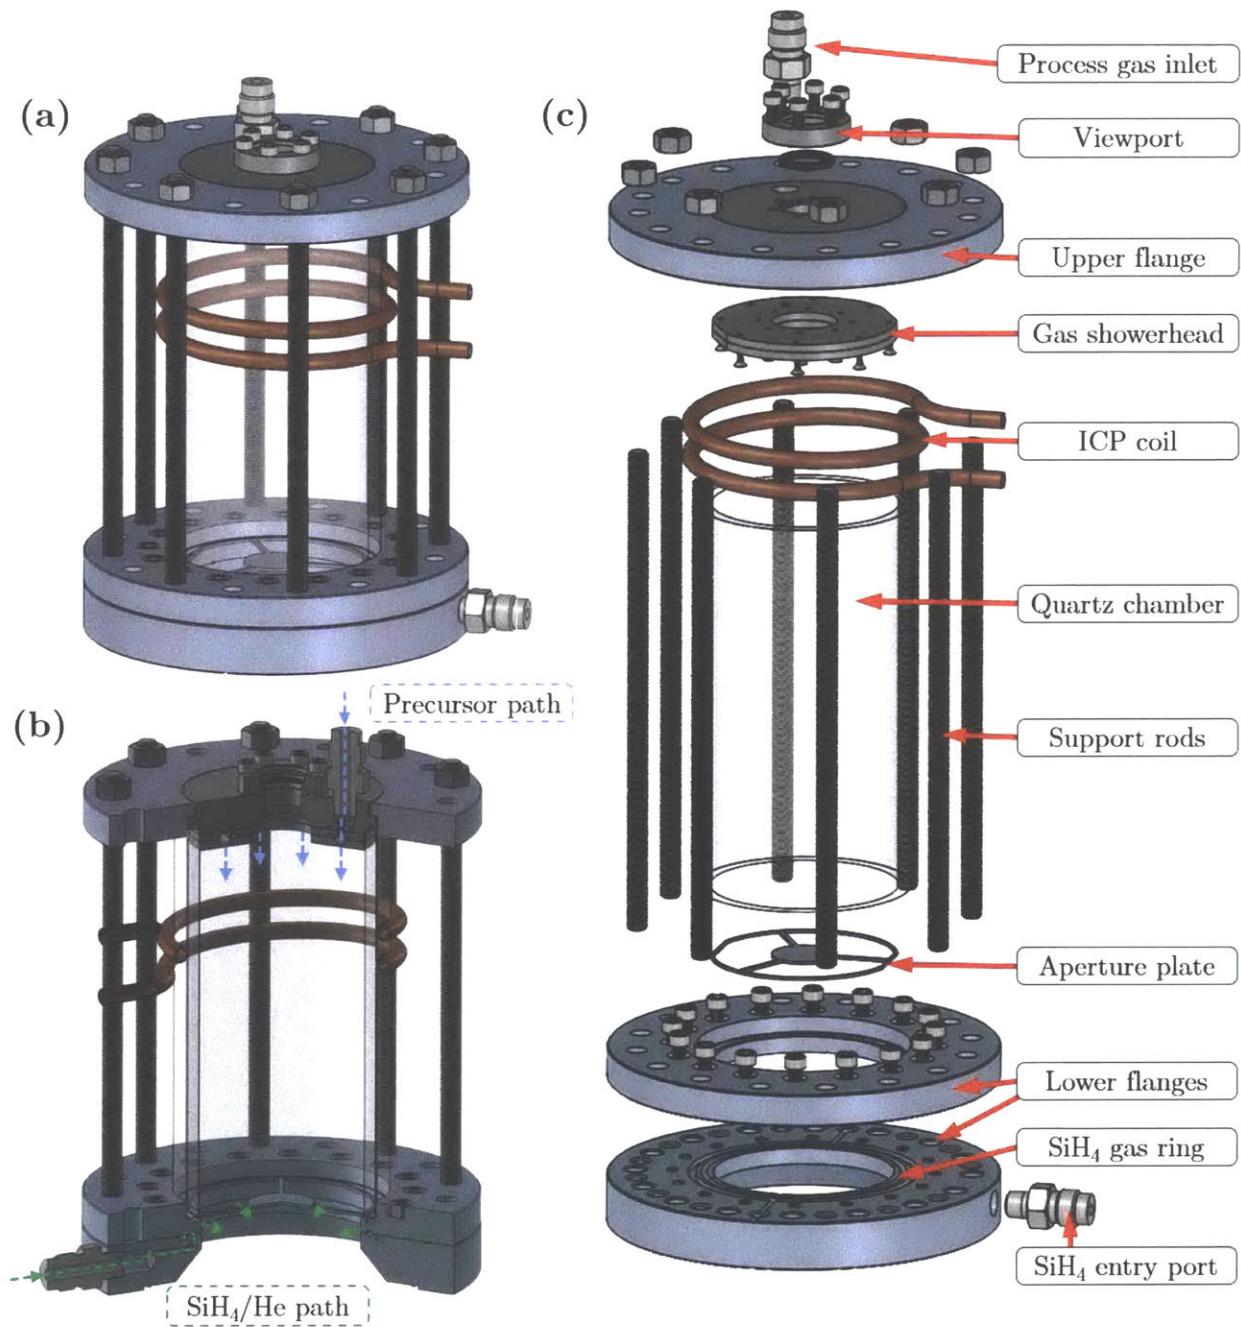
Renderings of the UCA. (a) The assembled UCA; (b) Cross-sectional view showing both gas entry paths; (c) Exploded view with labels for key components.
